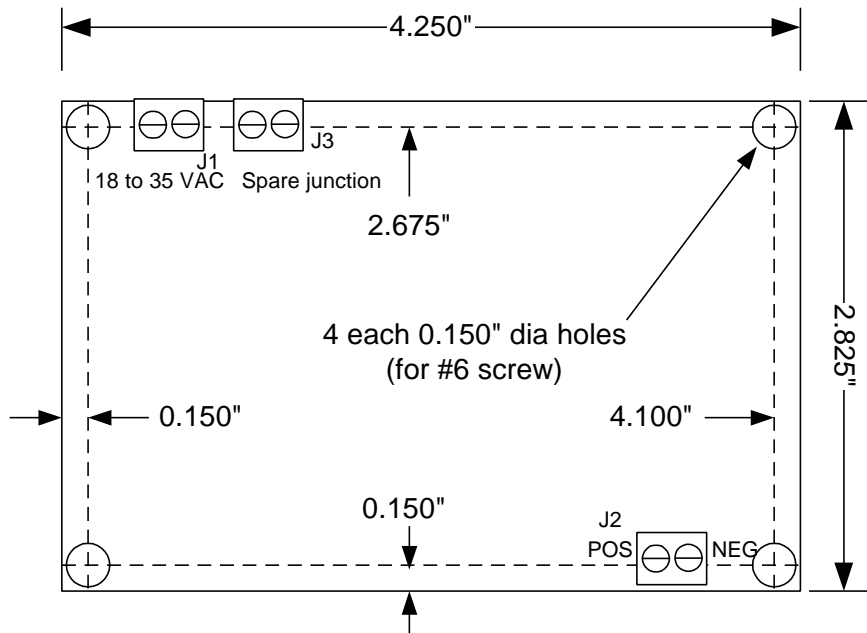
PMDX-136 Dimensions and Mounting Holes
